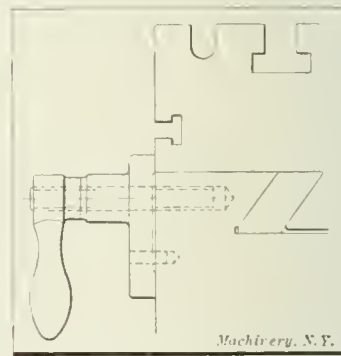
Clamping Plate for Edge of Milling Machine Table
